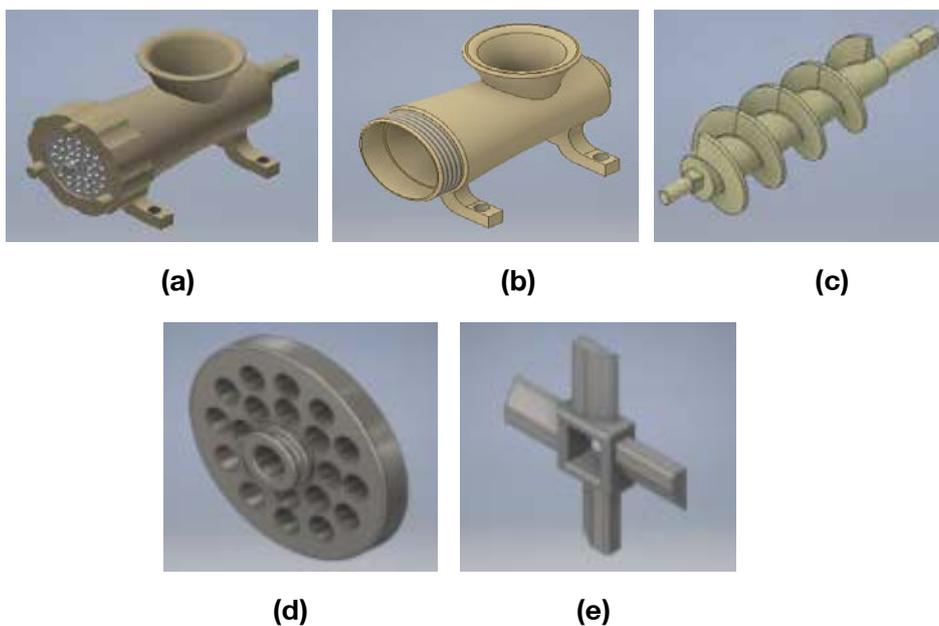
(a) Crushing machine (b) Crushing jacket (c) Screw compression (d) Front plate
